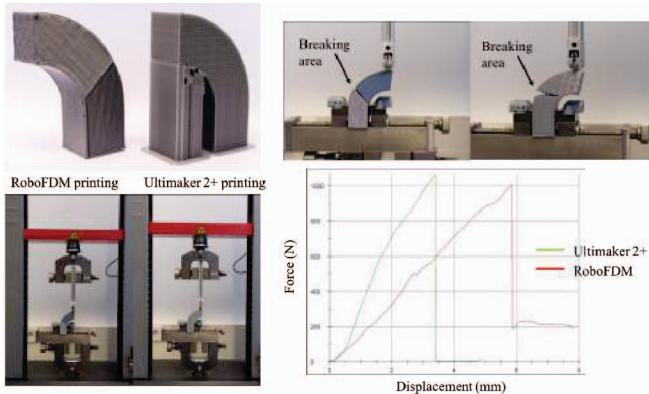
Mechanical tests taken on models fabricated by RoboFDM and conventional 3D printing.
